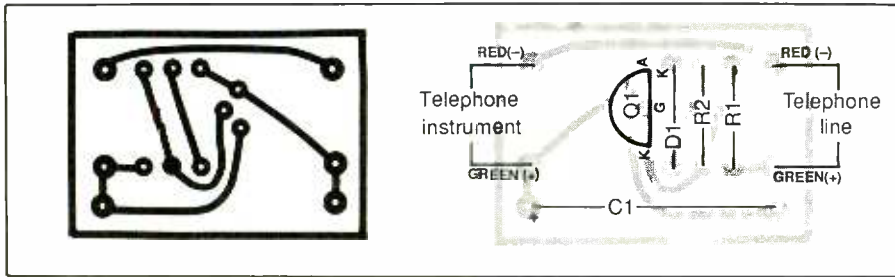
Actual-size etching-and-drilling guide (A) and wiring diagram (B) for Extension Phone Lockout pc board.
